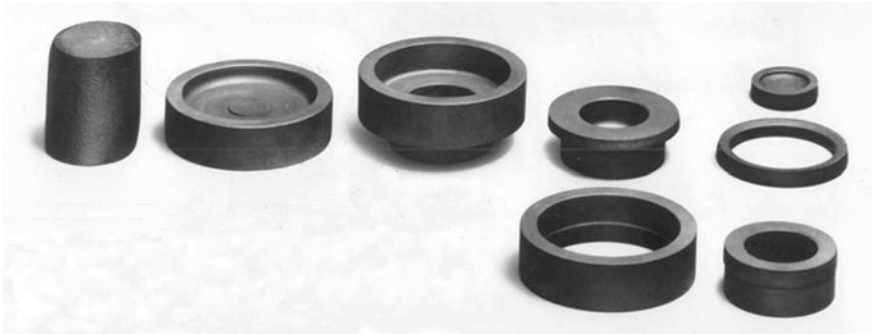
Operating sequence for the rings of a ball bearing (Source Hatebur Umformmaschinen GmbH)
